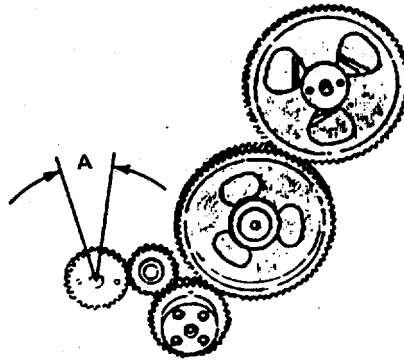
Lube Oil Pump Gear Backlash.
